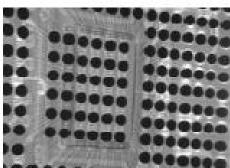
An x-ray view taken at an angle through a BGA shows individual solder balls and wire bonds but reveals little about micro-cracks and corrosion on PCB solder pads.
